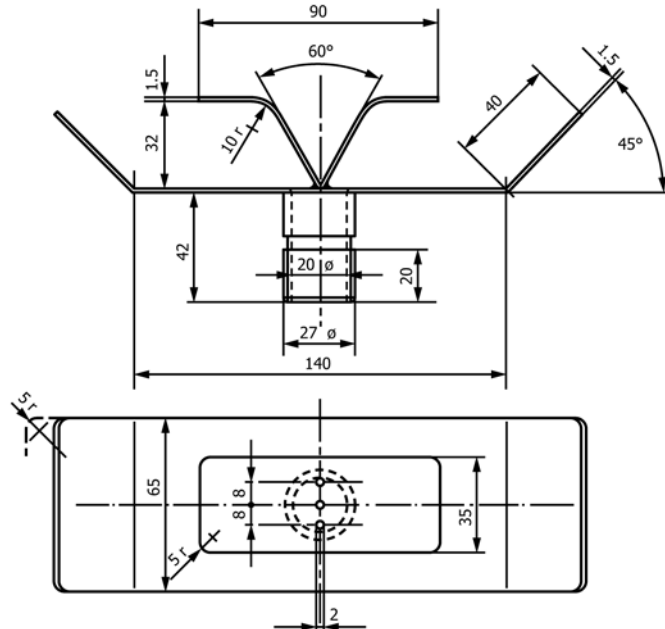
Rebound Nozzle, With Dimensions in Millimetres
